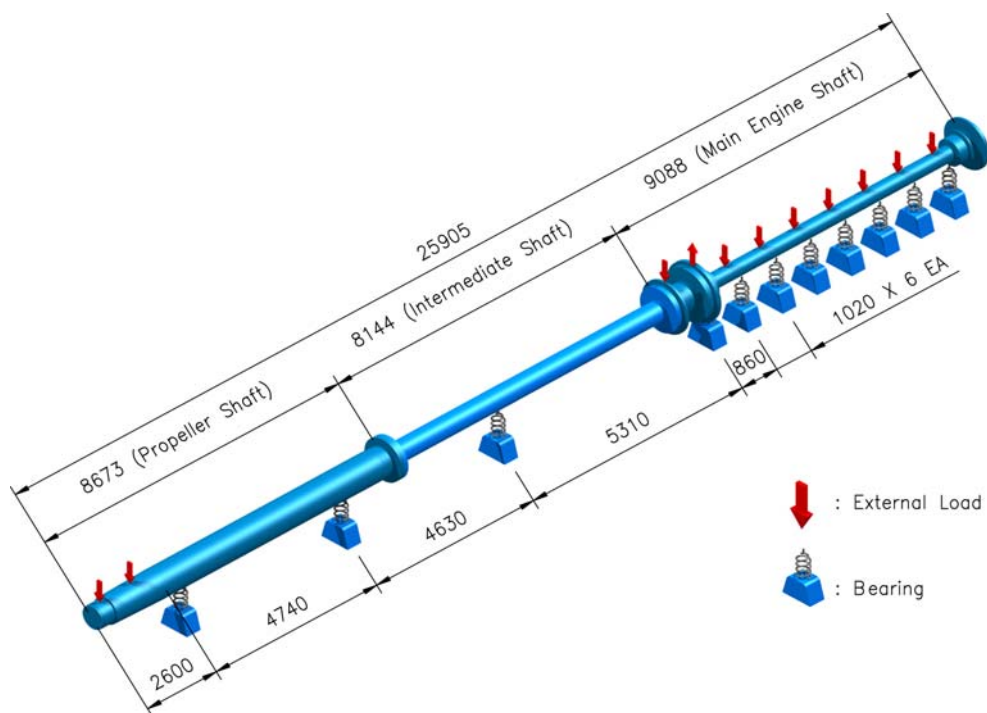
Modeling of shafting system for shafting alignment calculation(c)
